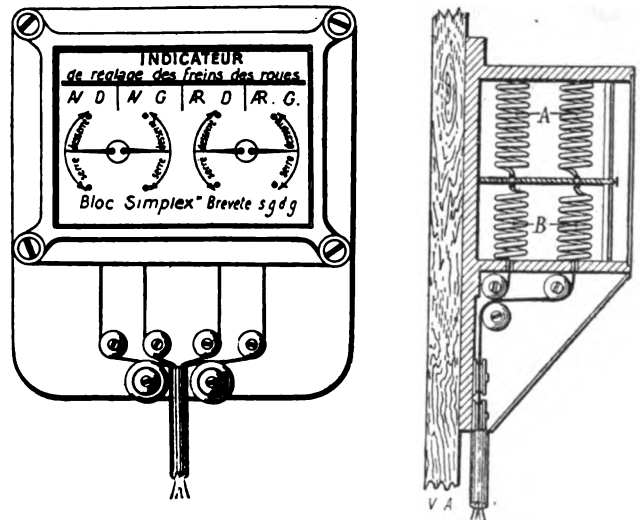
Details of dashboard indicator of Hamon four-wheel brake.
